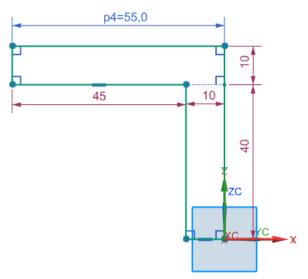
Bottom Beam's Longitudinal Connection - Connecting Brackets' profile
